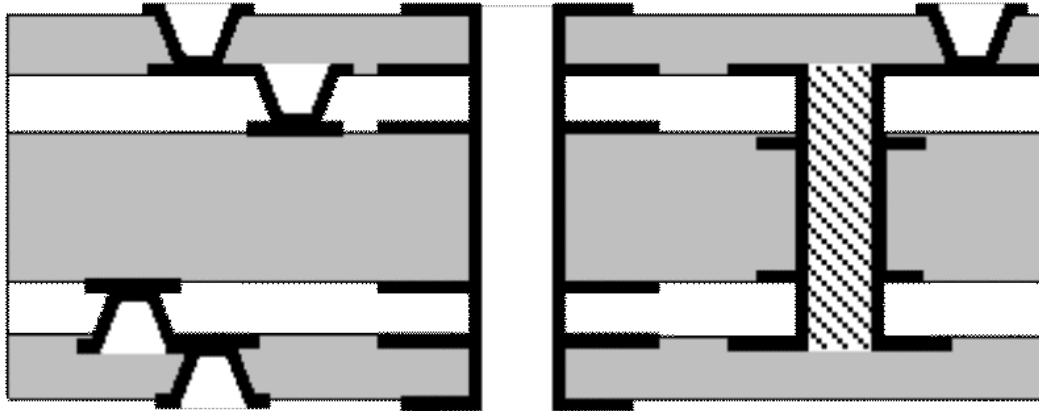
Via/Pad structures in a typical multi-layer PCB board
